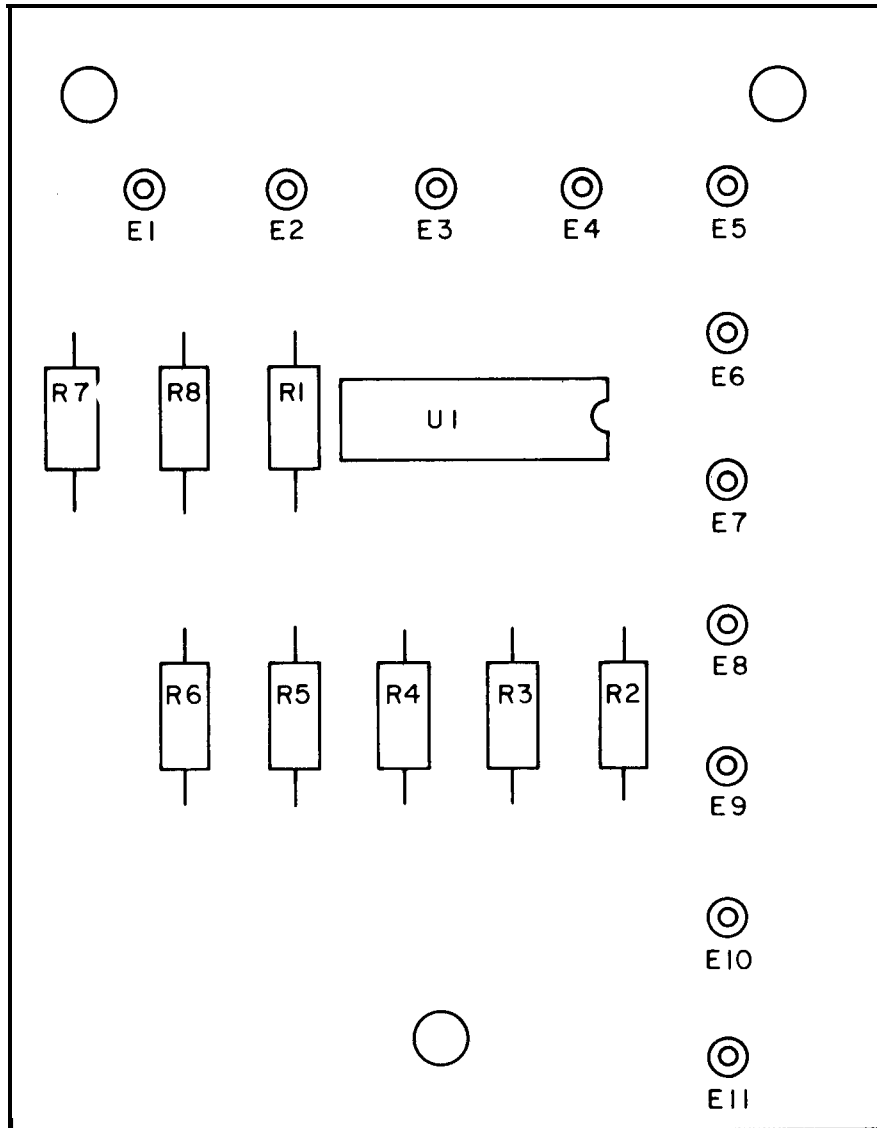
KEYBOARD TEST FIXTURE, TB1.
